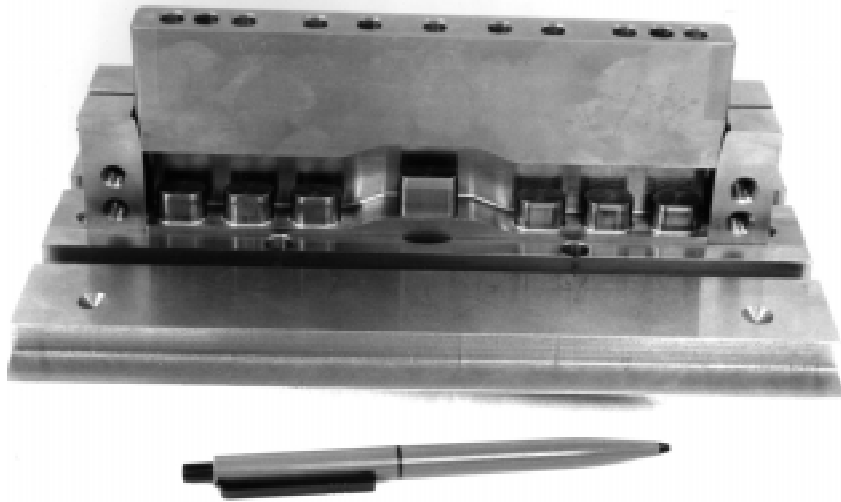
Photograph of near-net-shape mould for the bone facing plate of the implant
